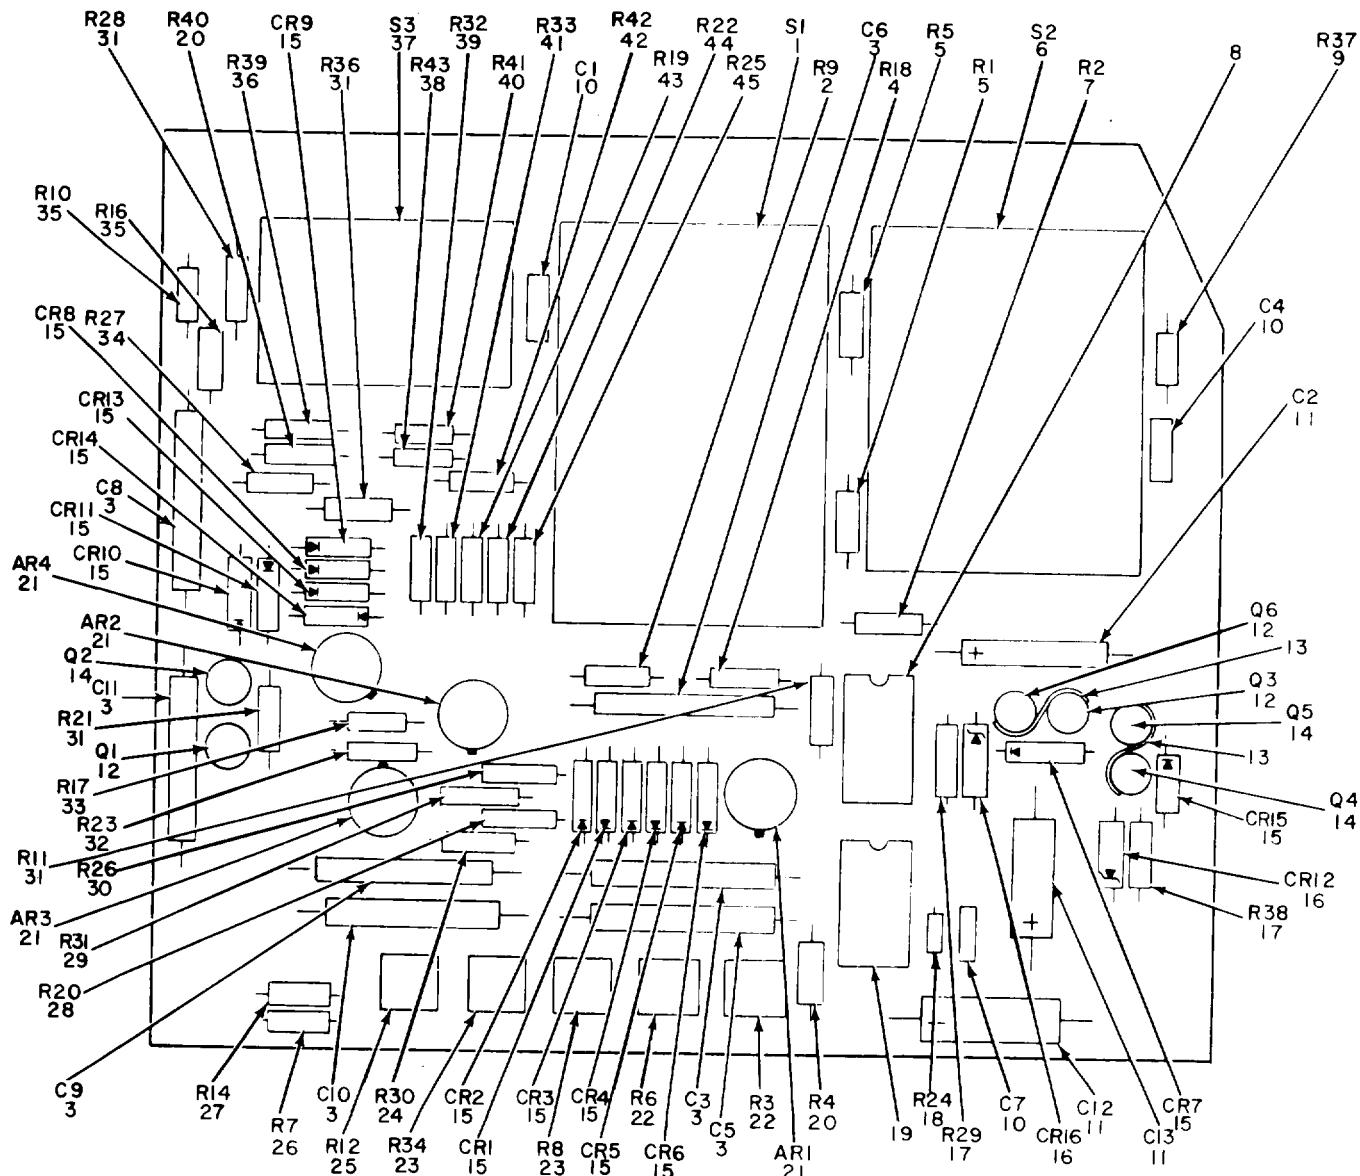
Transistor Test Set TS-1836D/U, Panel Assembly.
